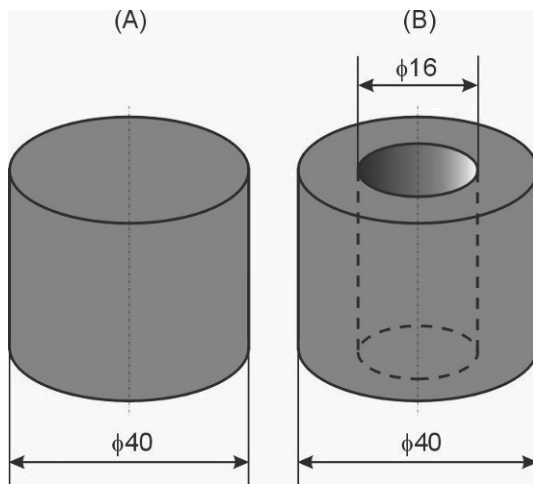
Dimensions of the cylindrical sample types used for investigations
